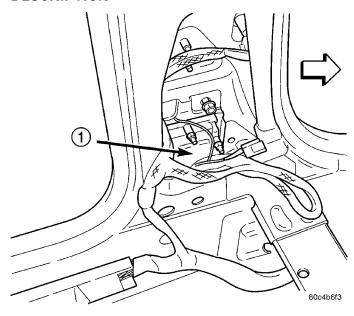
SIDE IMPACT AIRBAG CONTROL MODULE LOCATION - TYPICAL
